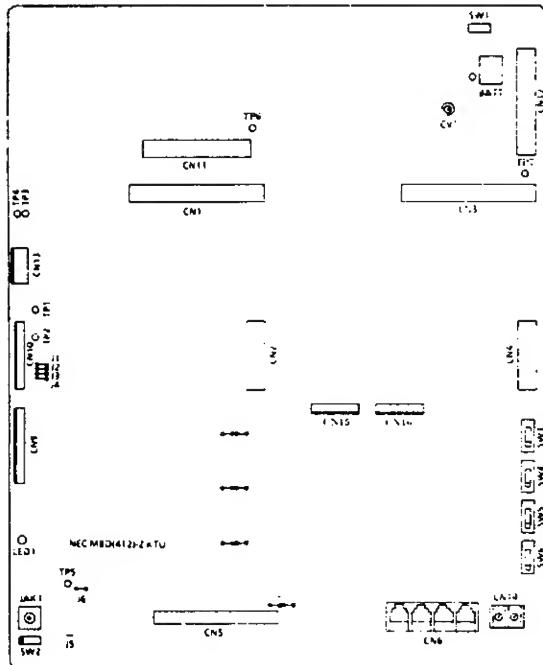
MBD(412)-Z KTU Switch and connector layout
